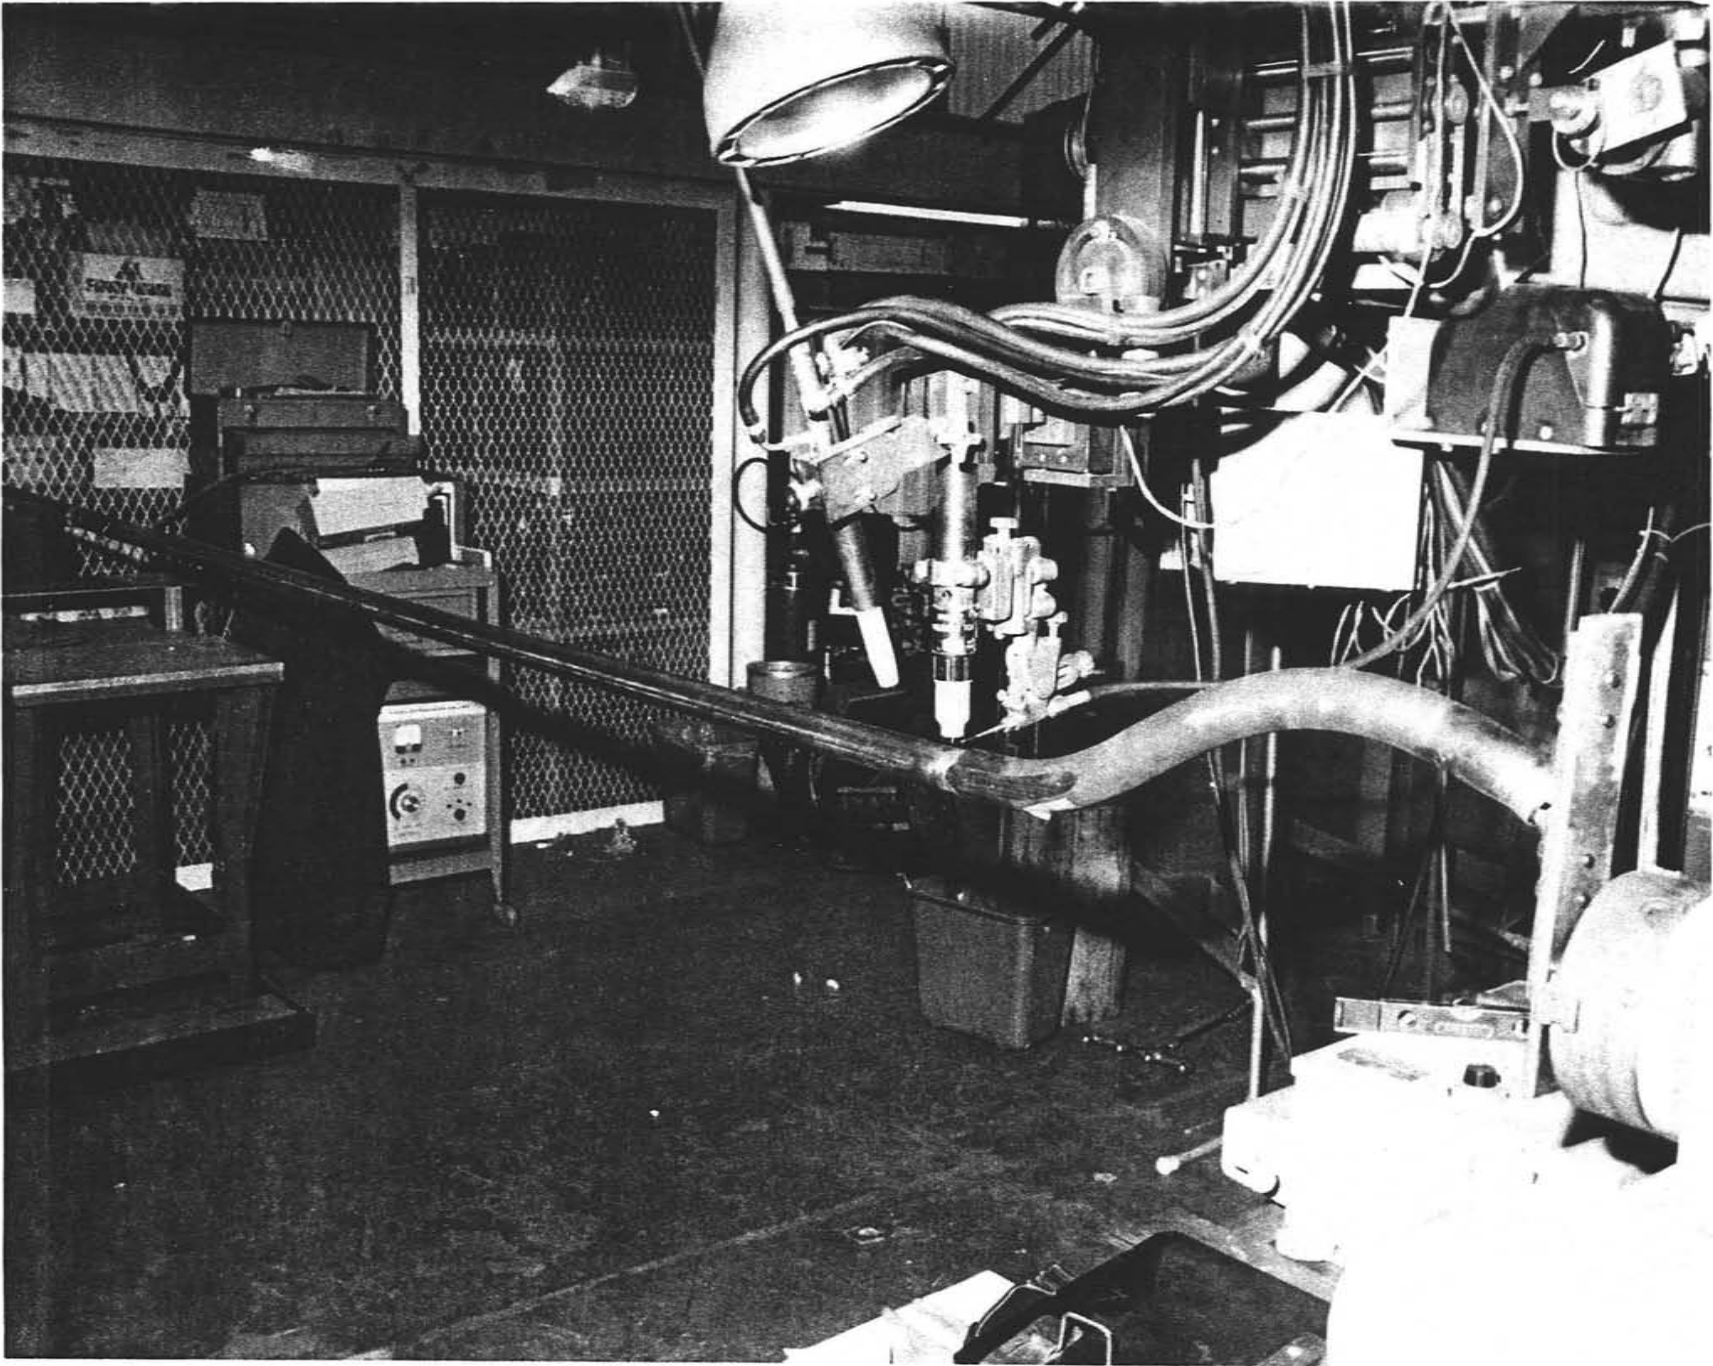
TUBE-TO-SAFE END BUTT WELD SET-UP
